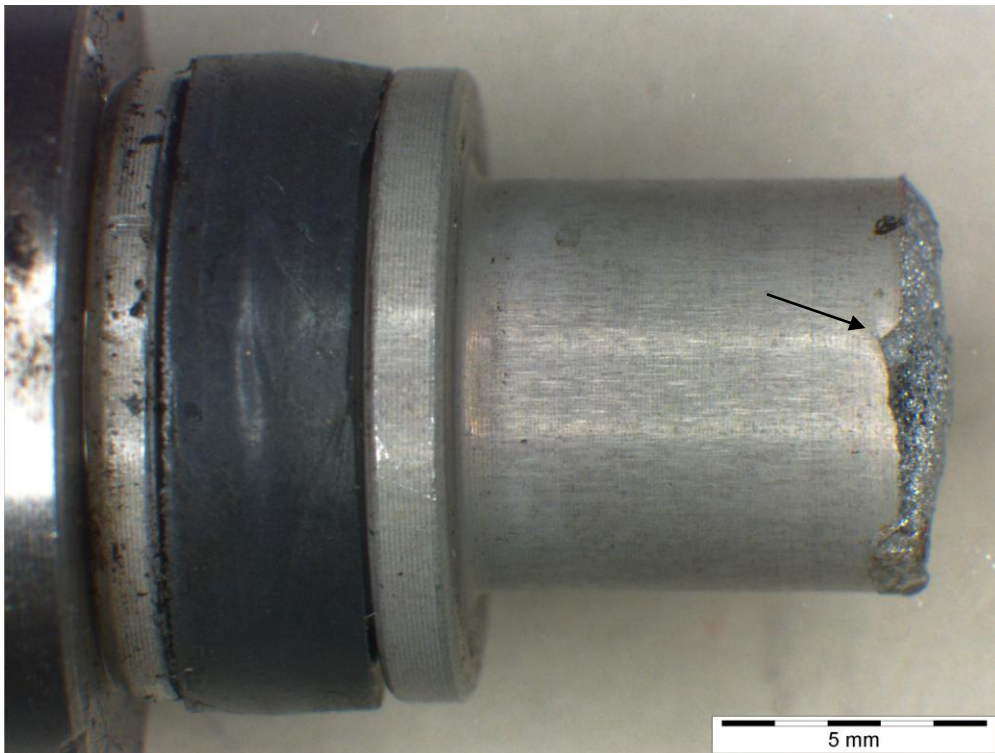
Fracture part B; Bottom view. The deformation from the final fracture is visible at the edge of the fracture surface (arrow).
